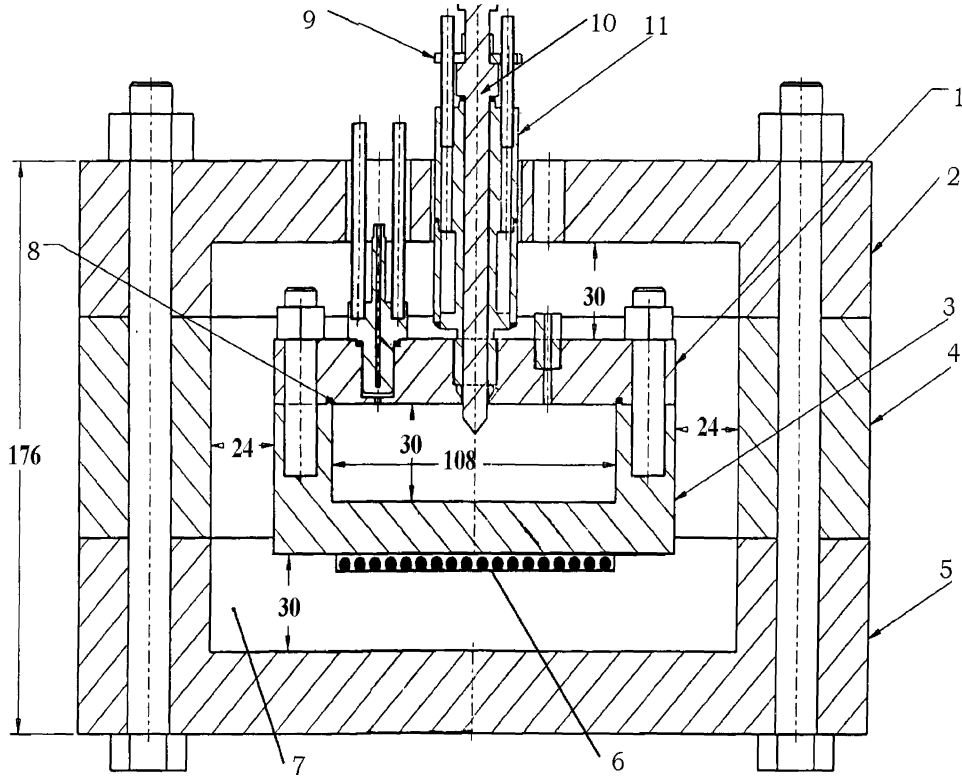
Dual-fuel constant volume combustion bomb: (1) cylinder head; (2) top outer casing; (3) combustion chamber; (4) middle inner casing; (5) bottom outer casing; (6) heating element; (7) insulation blanket; (8) copper ring; (9) injector clamp; (10) injector; (11) water-cooled injector holder.
